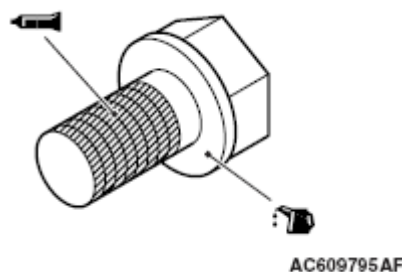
Applying Engine Oil And Sealant To Drive Plate Bolts
